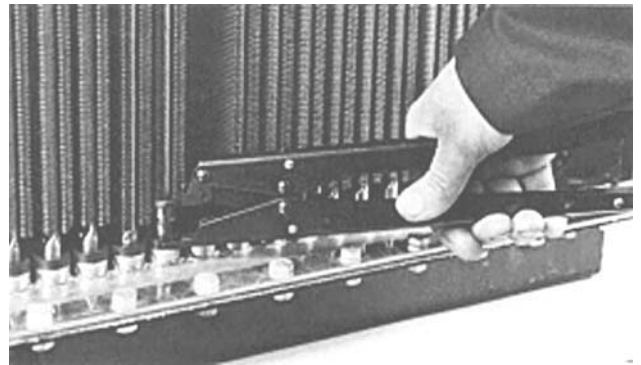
INSTALLATION TOOL (VJ6567)
